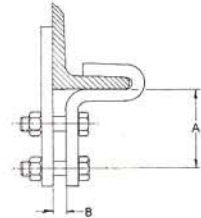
Angle and Channel Clamps are designed to support pipe lines from roof trusses and supplementary steel sections.
